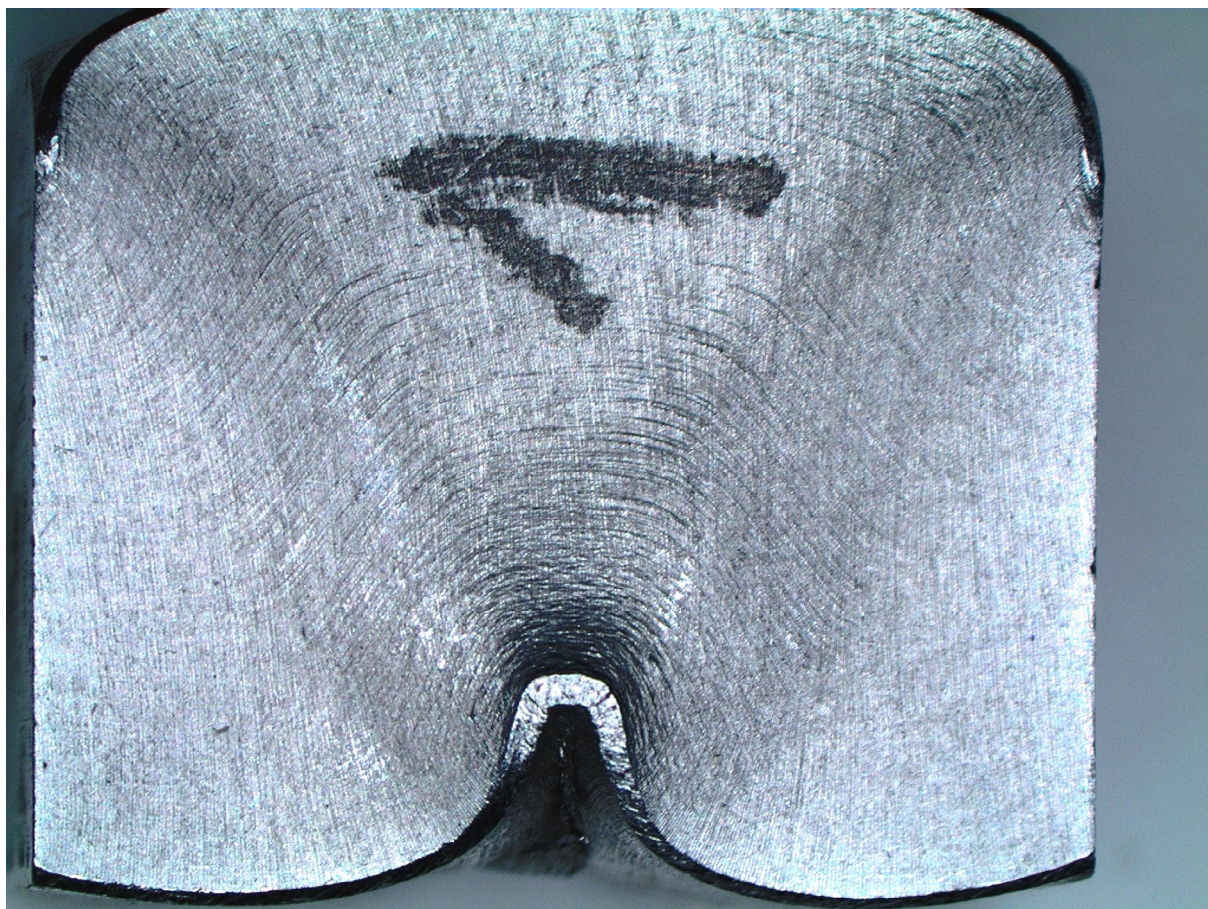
Milling scratch-lines (line defects) are available on the face of the duralumin specimen
